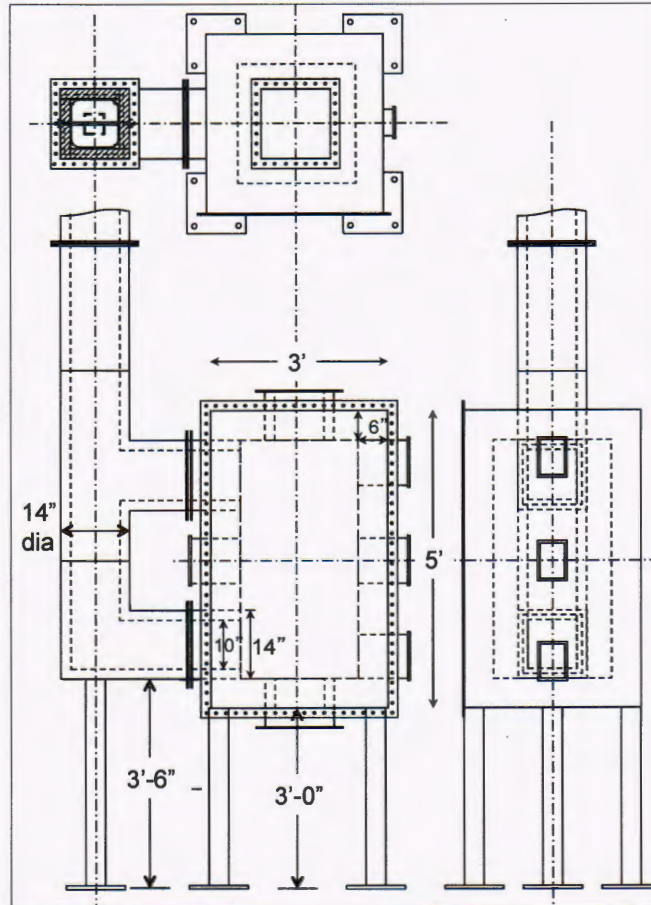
Existing furnace. Here, a general arrangement of the furnace is shown sans burner. The outside dimensions are 3'x3'x5' and the inside dimensions (insulated volume) are 2'x2'x4'. The furnace is capable of 2300 °F continuous operation and has four sight ports (3 East, 1 West) as well as top and bottom burner inlets to allow for up- or down-firing. In normal operation one of the stack outlets is blinded. Draft is controlled by means of an outlet damper.
